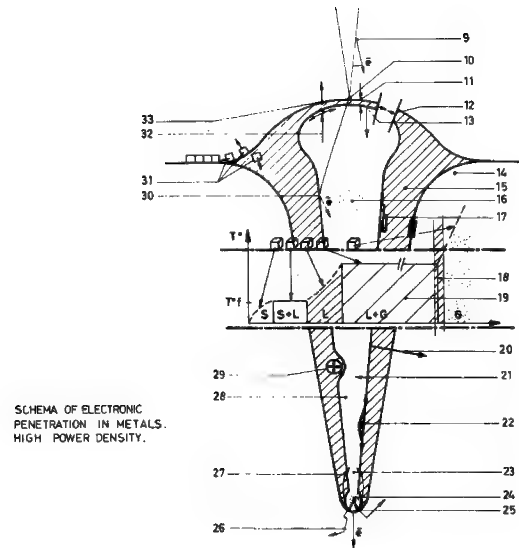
Electron Beam Weld Cavity (Meulemans)
